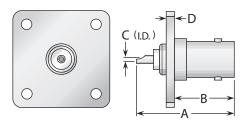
(Solder pot contact, 1" square flange, interchangeable with type N standard flange size)
